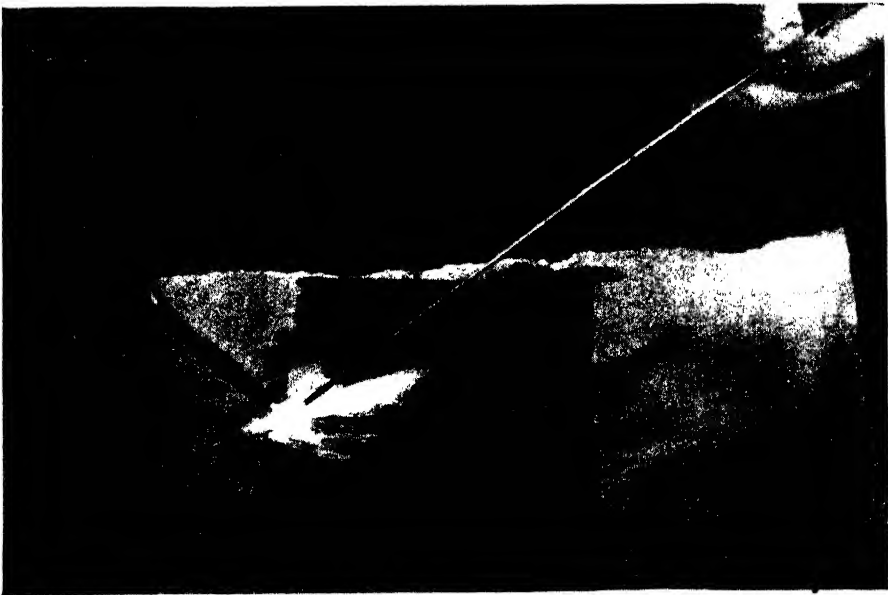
COMMENCING TO WELD COPPER SHEET, SHOWING ANGLE OF ROD AND BLOWPIPE
